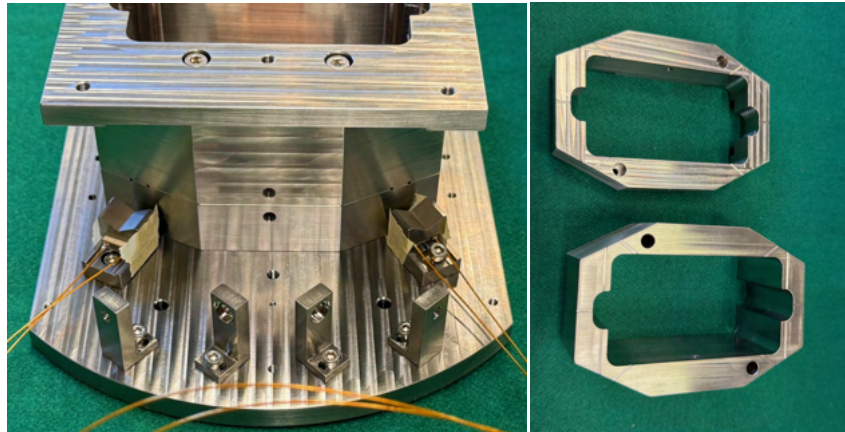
Left: picture of the alignment tool positioned in the assembly. Right: details of the cavity path engraved in the alignment tool.
